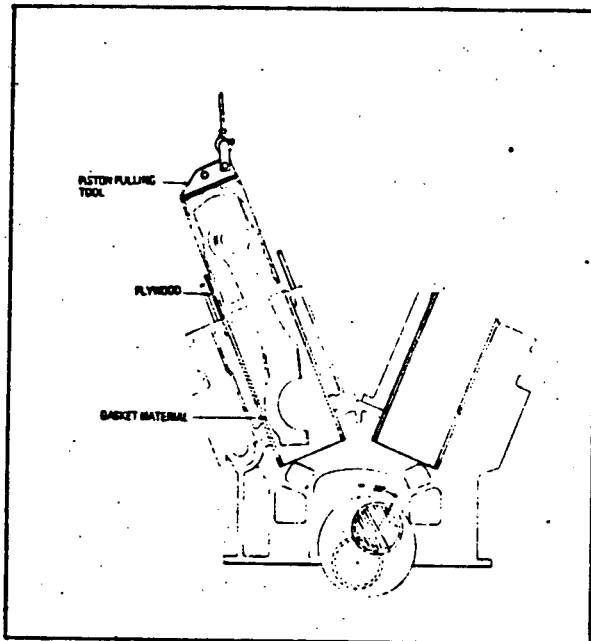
C-6. Lifting Master Rod and Piston From Cylinder Liner.
